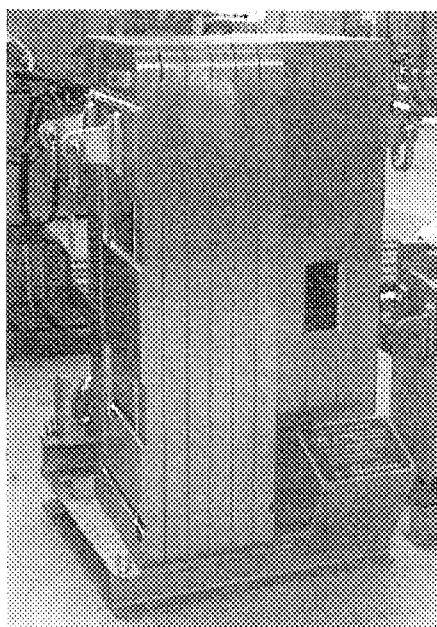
Fabricated shield block and assembled first wall mockup
